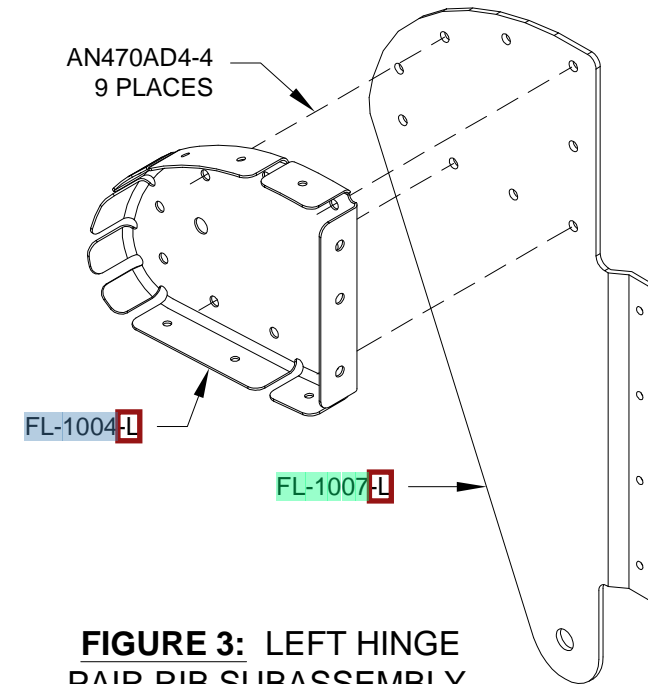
LEFT HINGE PAIR RIB SUBASSEMBLY
